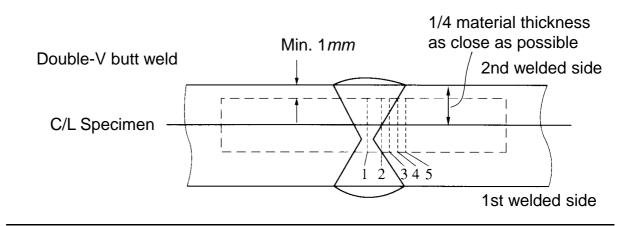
Sampling position of Charpy V-notch impact test specimens (Weld)
